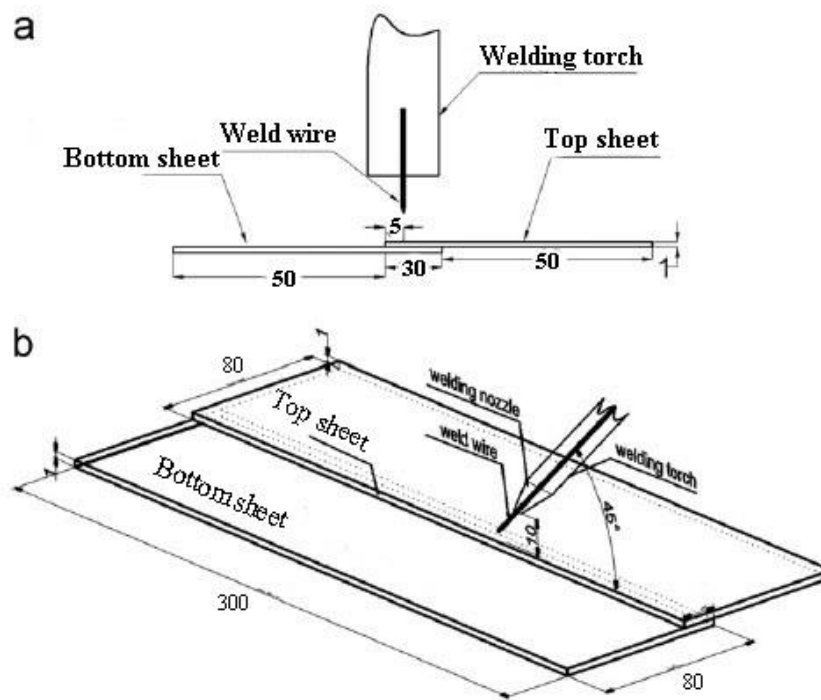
Schematics of lap-shear joint configuration of test specimen: (a) welding torch and workpieces layout, and (b) workpiece configuration.
